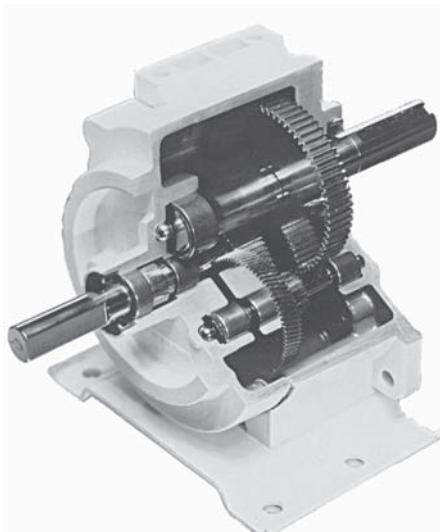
Triple-reduction gear reducer. Helical gears for stage one; spur gears for stages two and three. The pinion for stage three is on the lower left and not visible. (Bison Gear & Engineering Corporation, St. Charles, IL)
